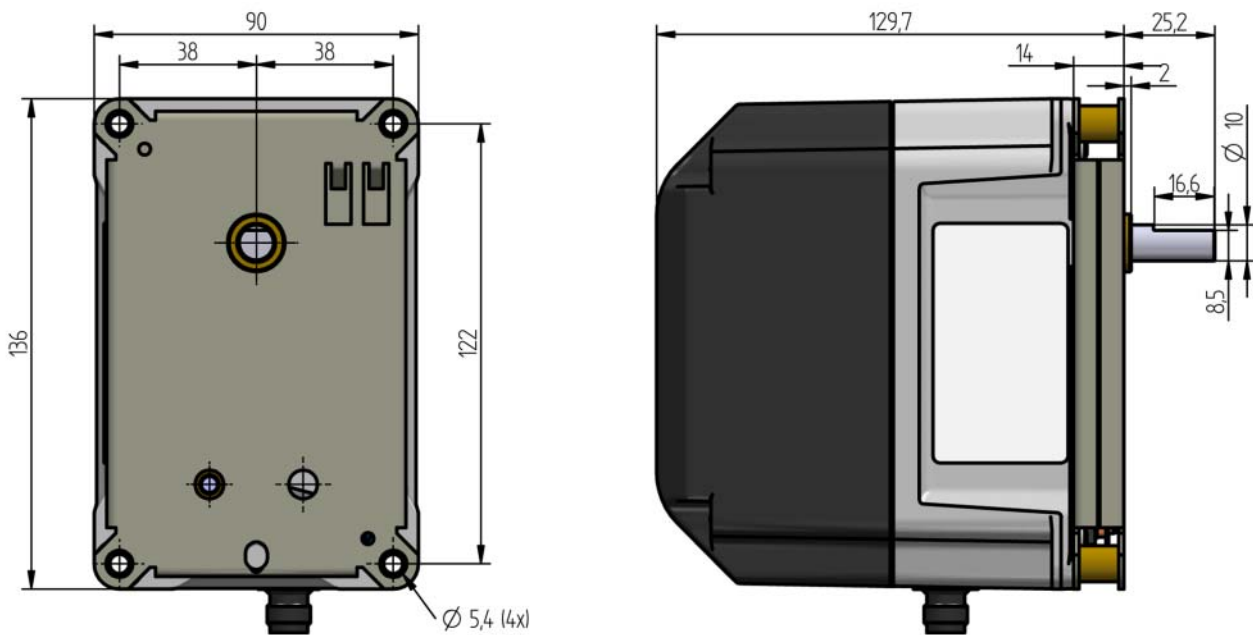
Dimensional drawing of servo motor type 662R5009-0 without cable but with plug
